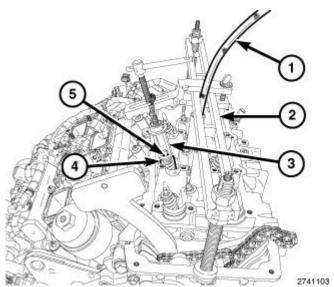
Shop Air Supply & Valve Spring Compressor Courtesy of CHRYSLER GROUP, LLC
